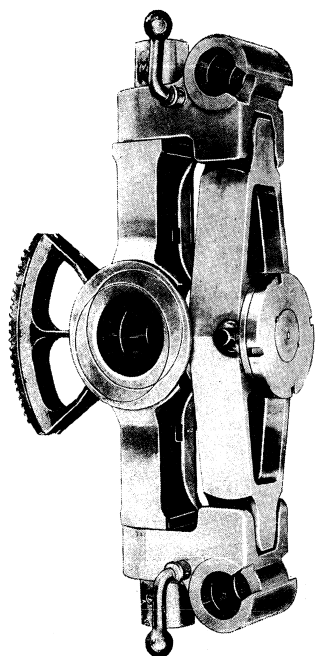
AXLE WITH EQUALIZER — GENERAL VIEW
